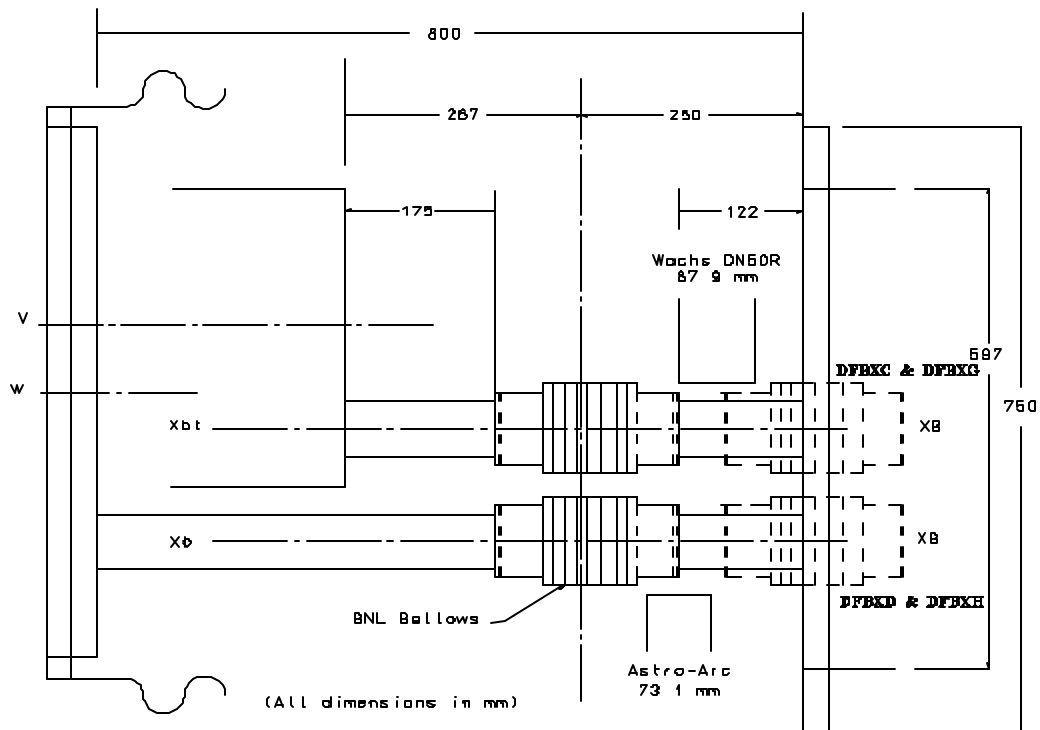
shows the layout of the interconnection between the m/c duct in D1 and the MBX1 duct in the DFBX. The bellows assembly is slid back on the D1 end while the electrical connections are made in the 183-mm-long open space. (The bus electrical connection details are given in Section 6.1 below). After the electrical connections are made, the bellows is slipped over weld flange on the m/c pipe onto the stub end of the MBX1 duct and then welded in place.
